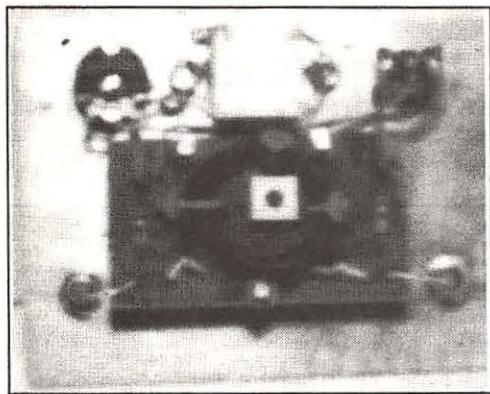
Interior view of the assembled SWR sensor. Note that L1 is rolled into a 1 inch OD coil to conserve space.
